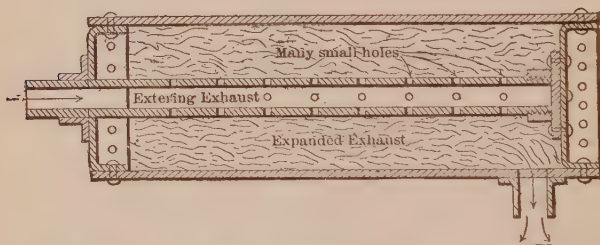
A simple form of muffler, as used on many cars, and which gives good satisfaction when well designed. It consists of a cylinder and a pipe so contrived that the pipe, which is drilled full of small holes, will admit the exhaust at high pressure, and as it is required to pass through a large number of small holes, it is split up and then expanded. The gas passes to the atmosphere in an uneven flow, at a pressure slightly above that of the atmosphere. This type of muffler is fairly efficient when well designed.
